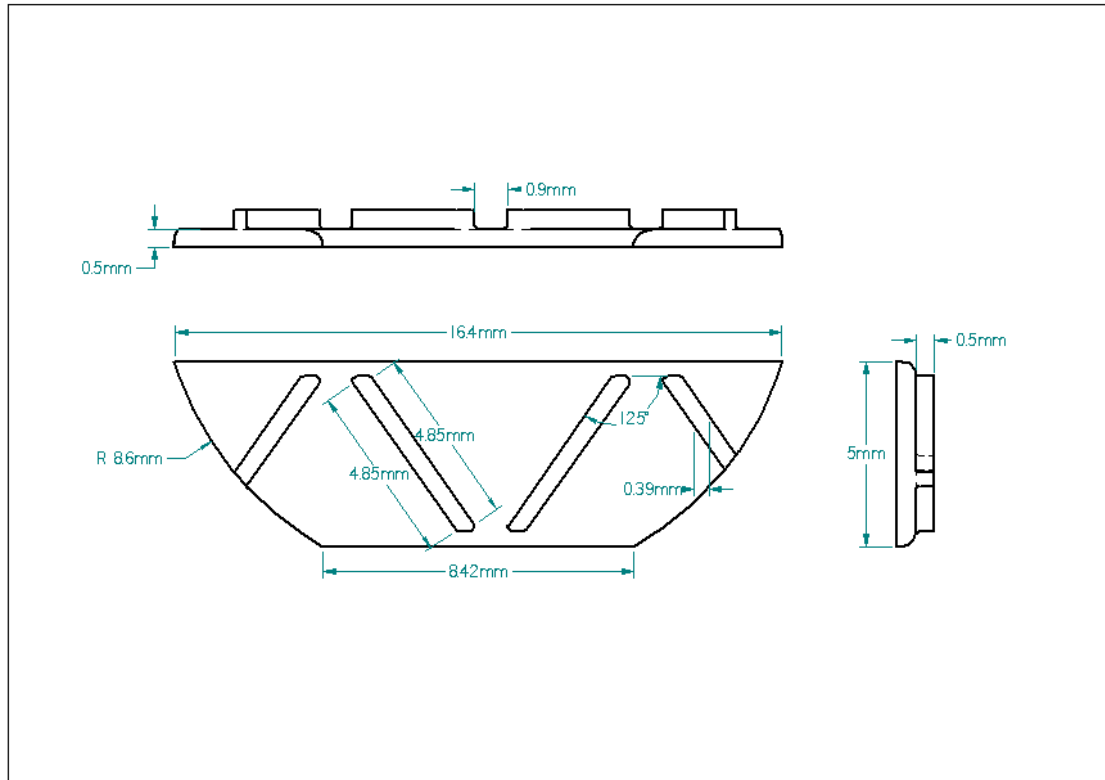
CAD drawing of the R05T vortex generator design
